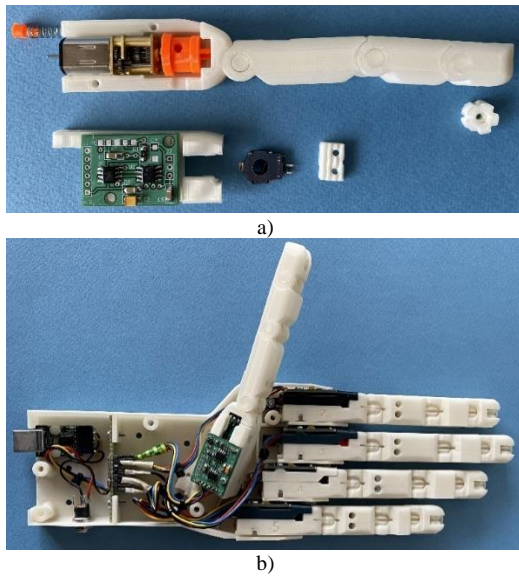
a) 3D printed finger with main components; b) 3D printed assembled hand without palm cover.
